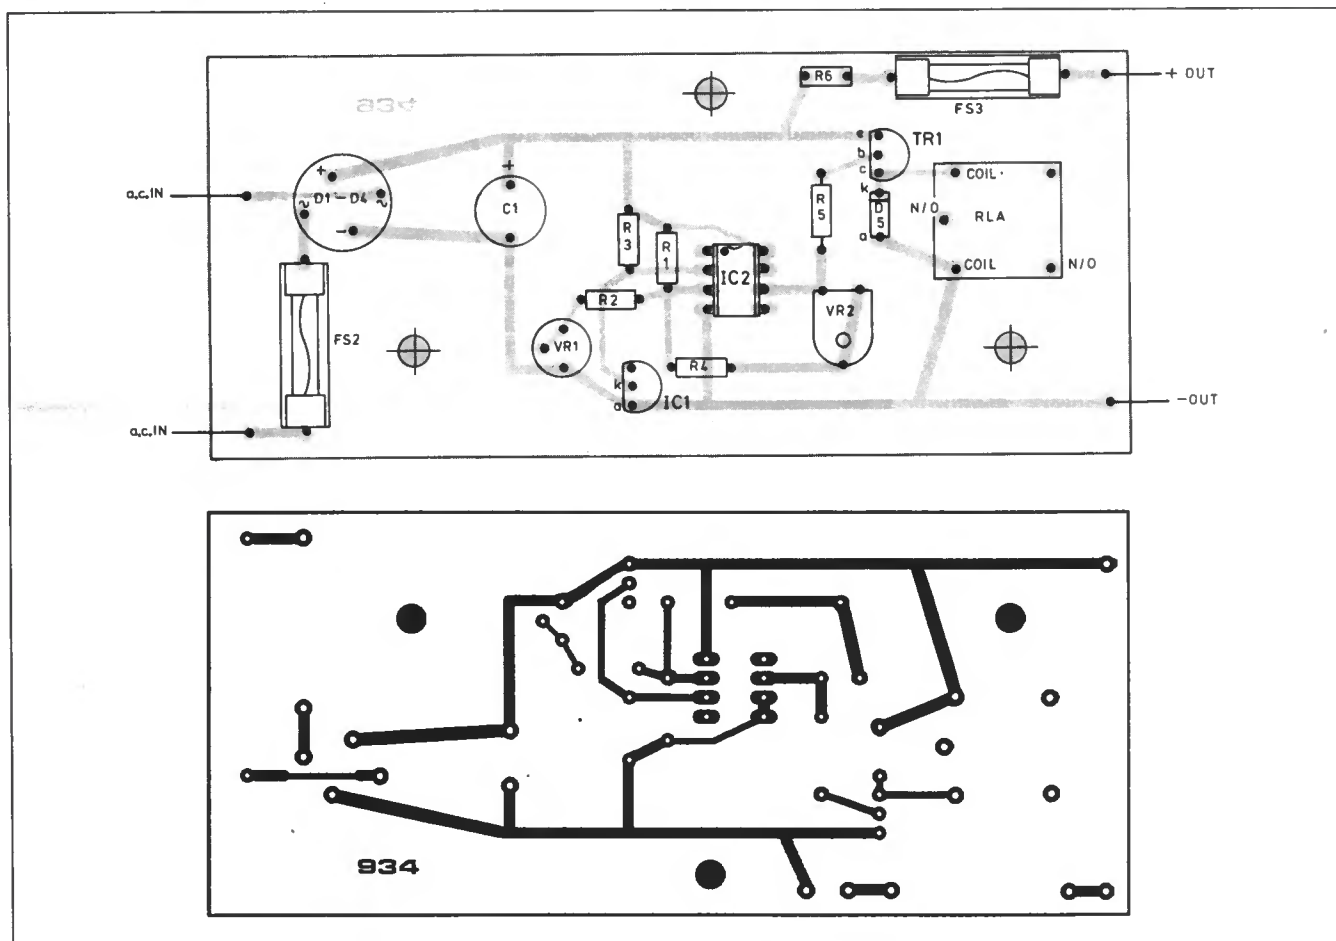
Printed circuit board component layout and full size copper foil track pattern for the Auto Battery Charger.
